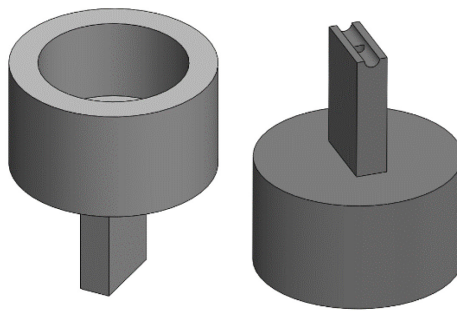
Cup fixtures into which the tube locking assembly was inserted.
